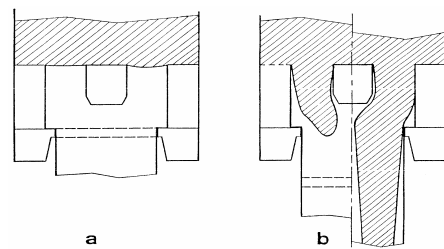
Charge weld; a) upsetting of a new billet, b) charge welding in progress[2]
